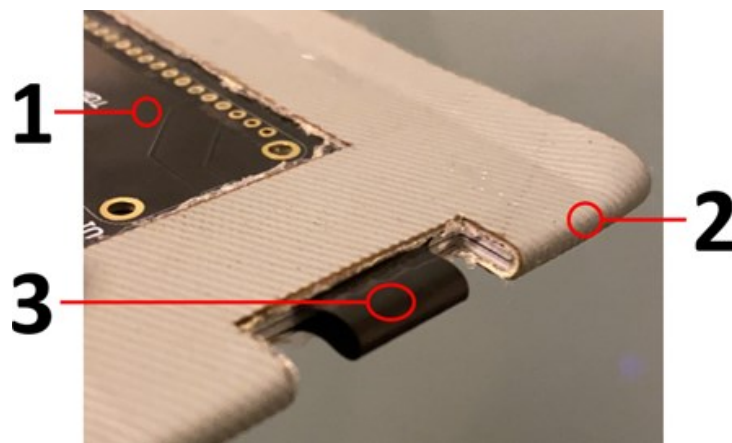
Folded FRET Prototype. 1) Electronics soldering pads. 2) Textile mechanical hinge. 3) Flex PCB.
